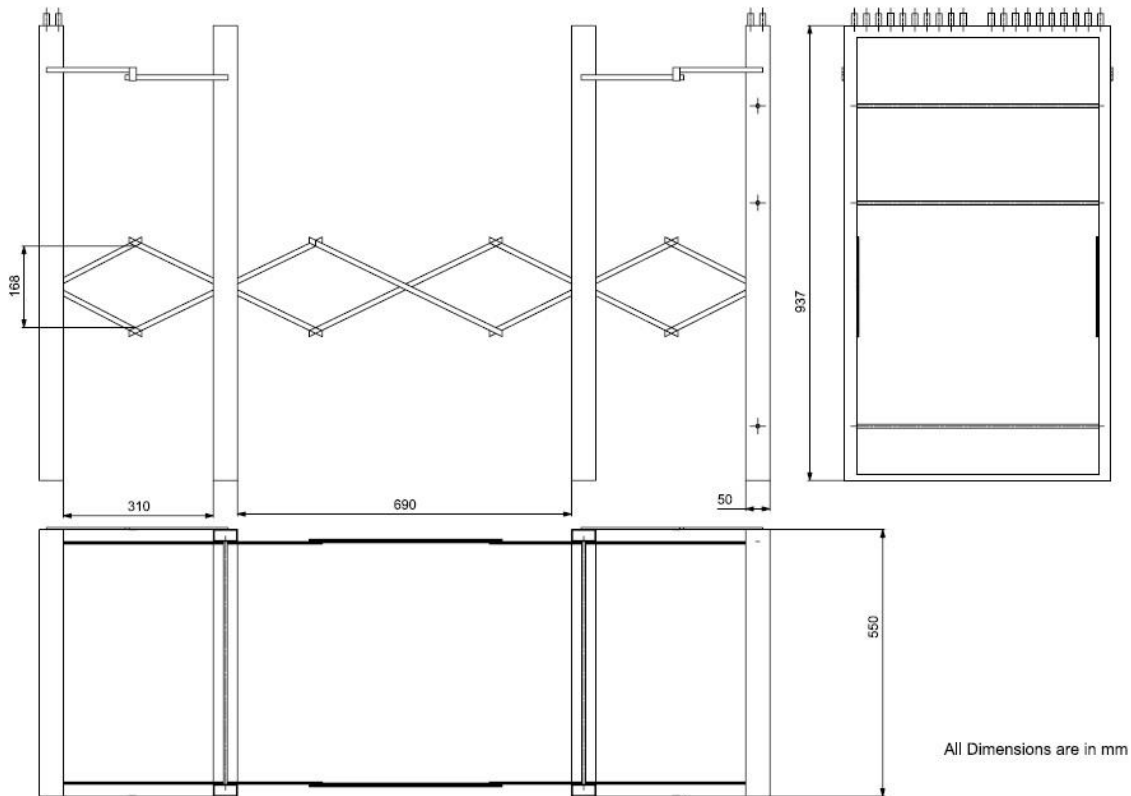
Detailed 2D Drawing of Foldable Multitasking Workable Platform for Rebar work
